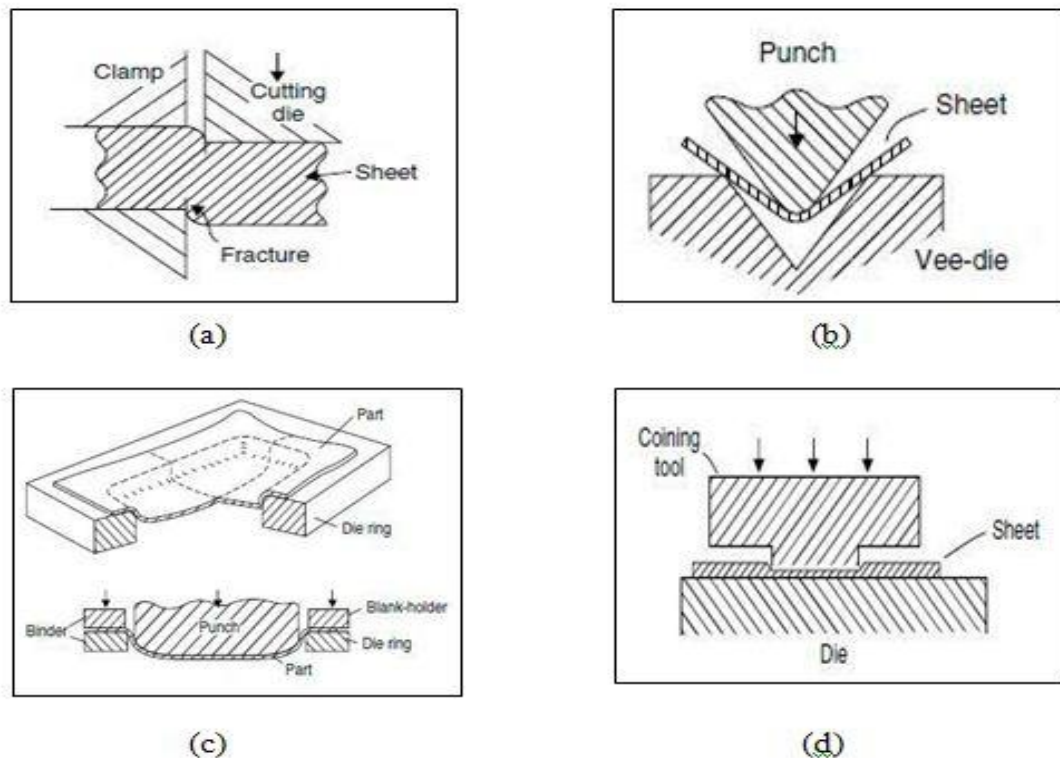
(a) Basic cutting process of blanking a piercing. (b) Example of sheet metal bending process. (c) Typical part formed in a stamping or draw die. (d) Thinning a sheet locally using a coining tool.
